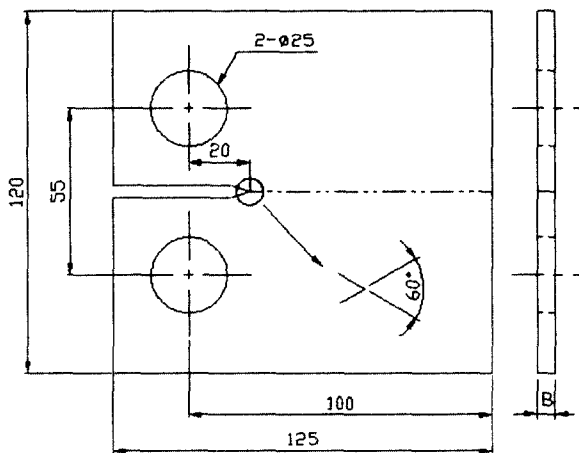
Shape and dimension of specimen (unit: mm, B = 6, 12, 18mm)
